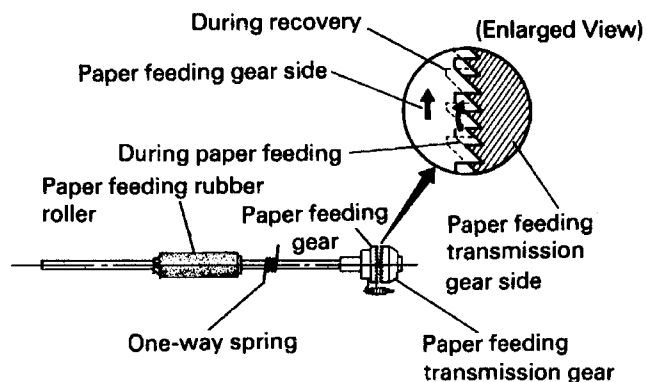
Operation of Paper Feeding Gear and Paper Feeding Transmission Gear During Paper Feeding and Recovery
